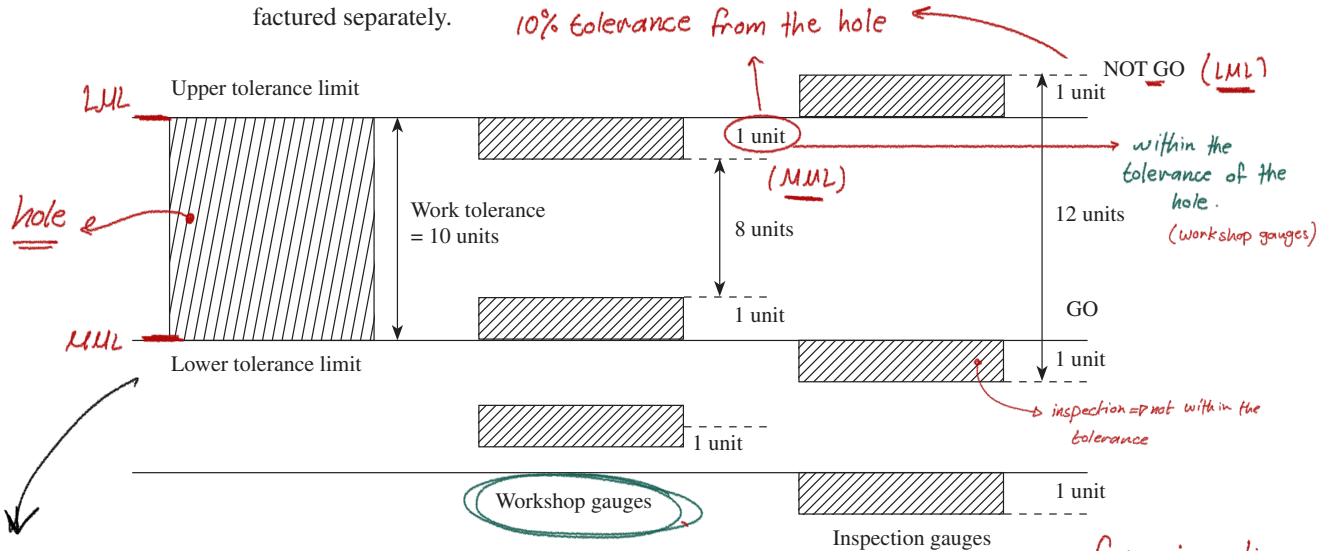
Disposition of tolerances on workshop and inspection gauges
